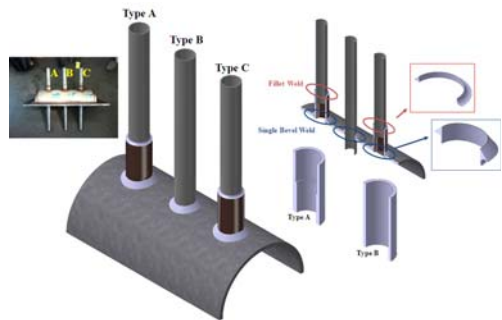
Three Type(A, B, C) Weld Specimens
